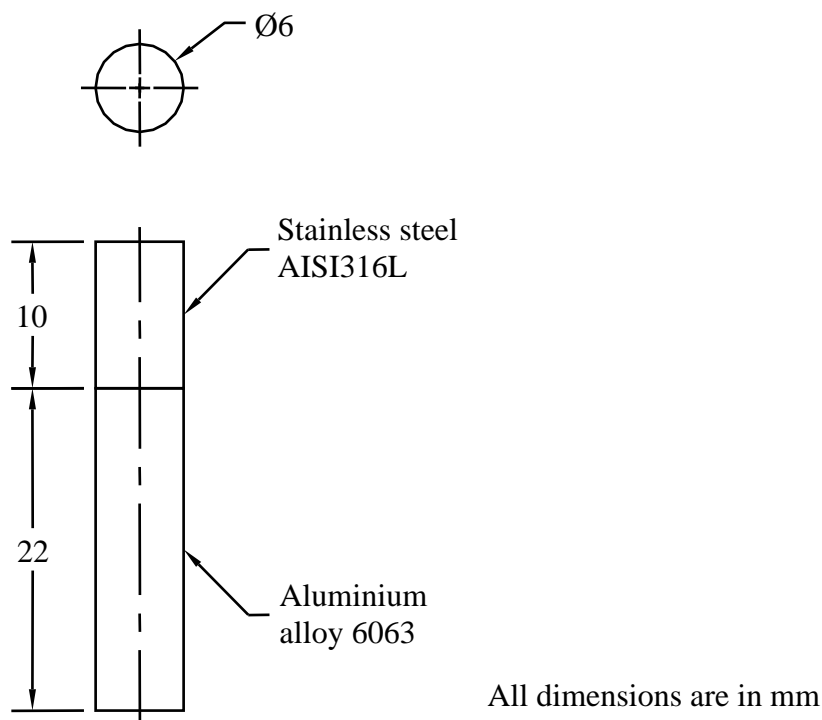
The configurations of the specimens for the welding experiment.
